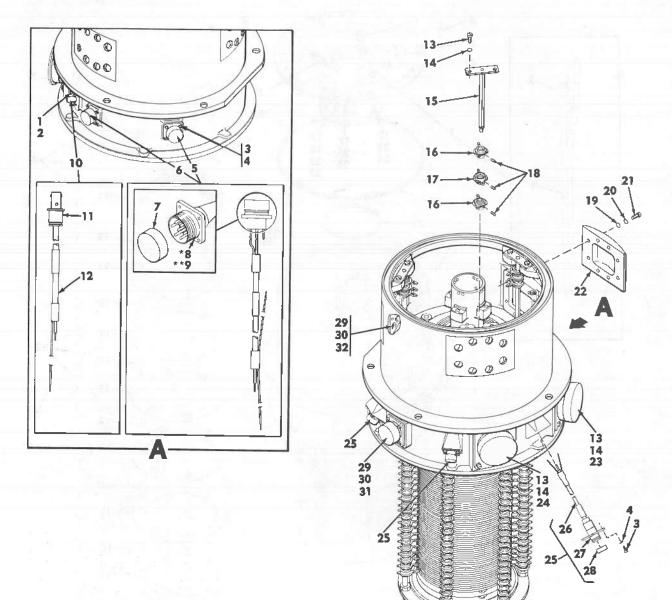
RING ASSEMBLY, ELECTRICAL CONTACT /9009416/-PAPTIAL EXPLODED VIEW
